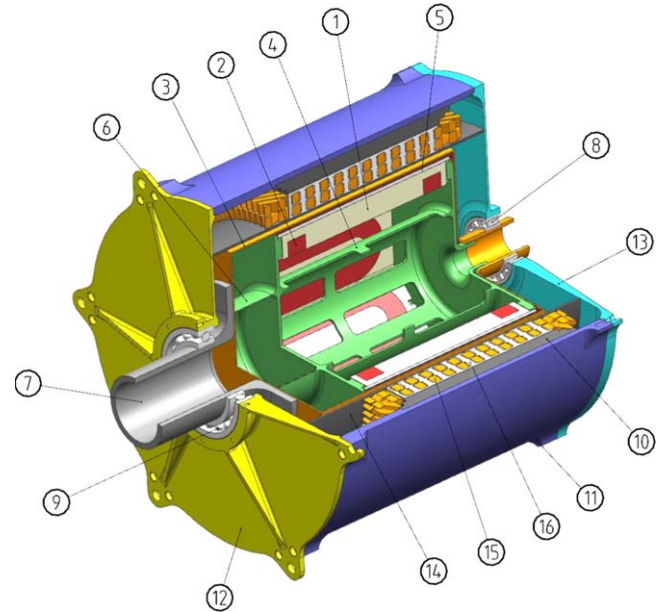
CAD model of the presented generator design. (1) Coil Carrier; (2) HTS-coil; (3) vacuum Jacket; 4 + (6) torque transfer elements; (5) bandage; (7) shaft; (8) NDE bearing; (9) DE bearing; (10) Stator yoke; (11) Housing; (12) DE Bearing shield; (13) NDE bearing shield; (14) slot pipe; (15) Armature winding; (16) stator support structure.
